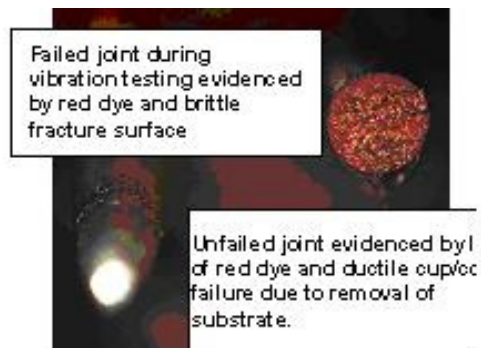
Ductile cup/cone failure of solder joints due to substrate removal vs. brittle failure due to vibration fatigue.
